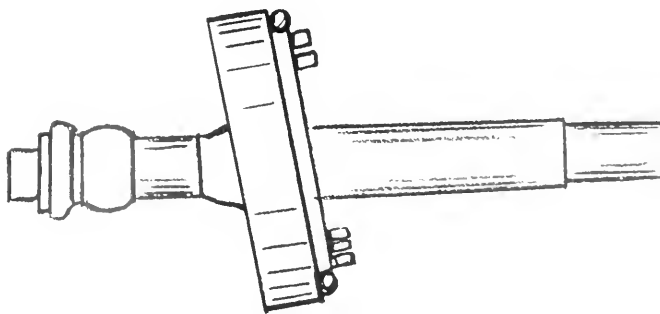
Socket ring or tilting thrust plate shown tilted.
